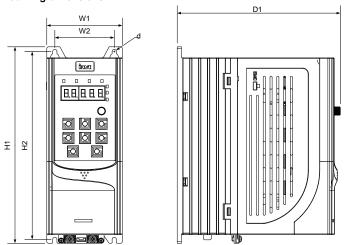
1.5–7.5kW VFD wall-mounting diagram
